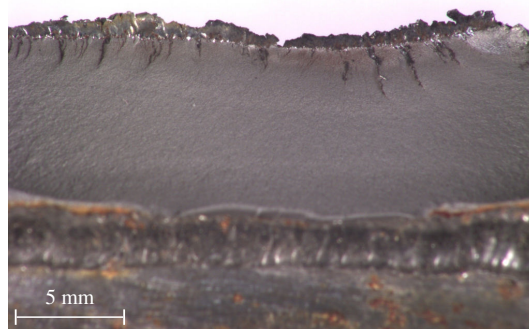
Fracture surface of a S690QL butt-welded assembly.
